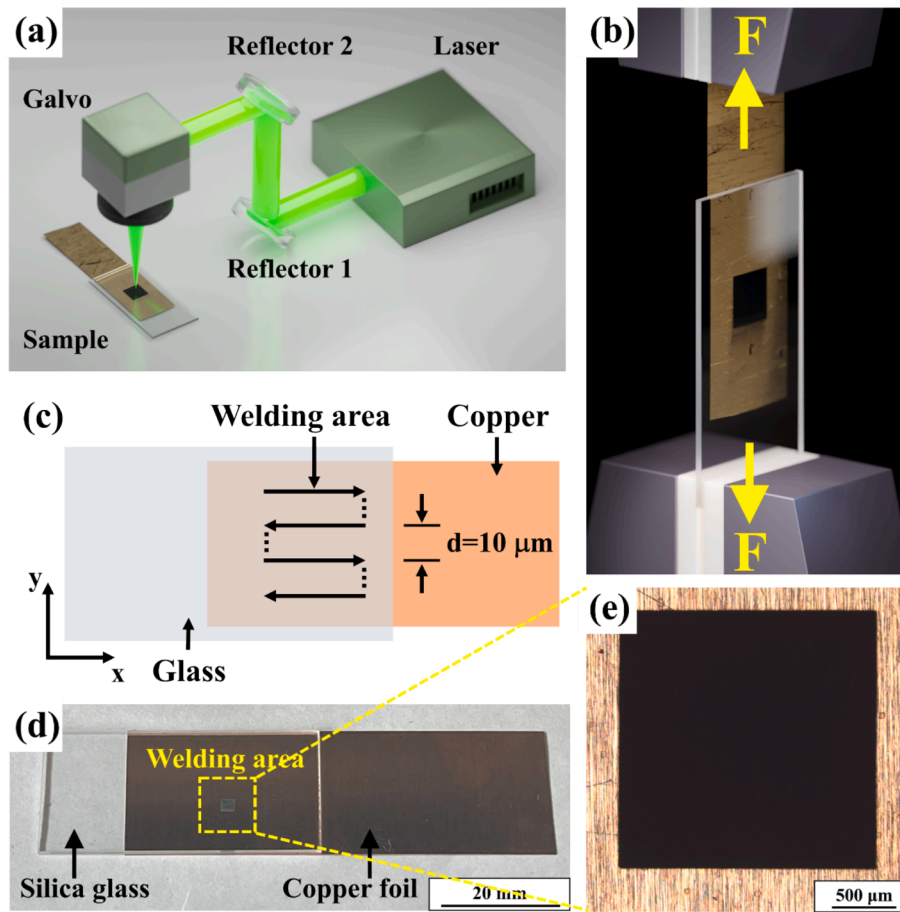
(a) Diagram of femtosecond laser welding system, (b) test method for shear strength, (c) scanning pattern, (d) photograph of the welded sample, and (e) welding area fixed at 2 mm × 2 mm.
